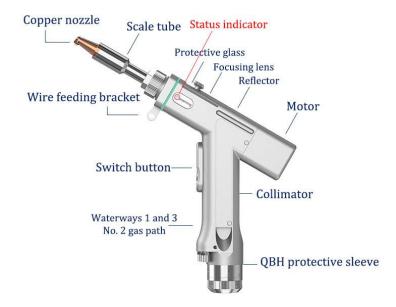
Schematic diagram of the SUP-23T welding head
